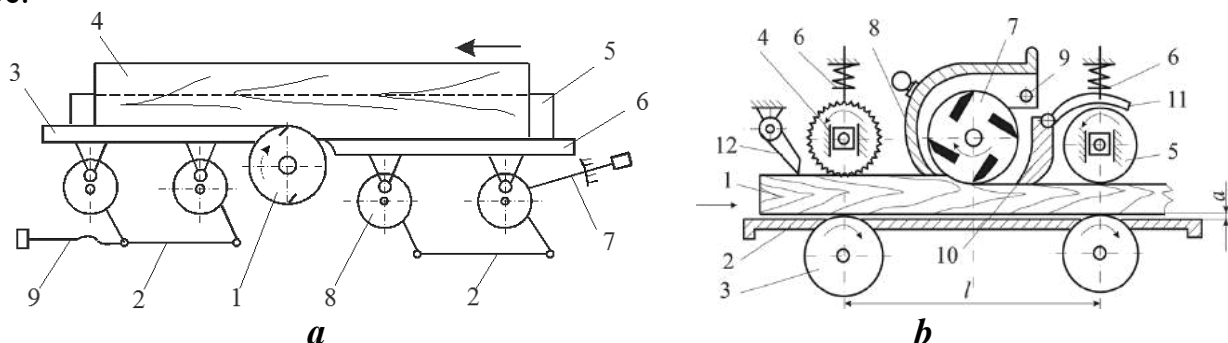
Schematic diagrams of jointing and thicknessing machines:
